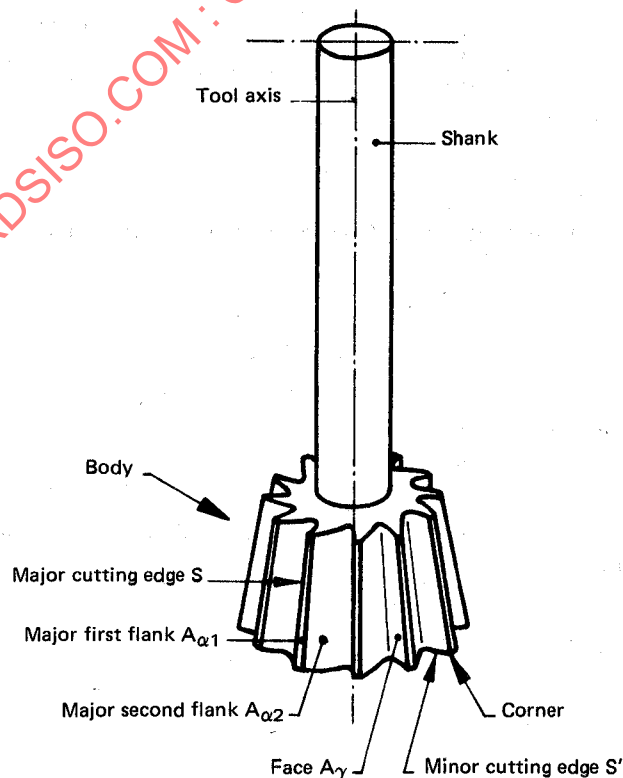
Cutting edges and surfaces on the cutting part of a single angle cutter with parallel shank
